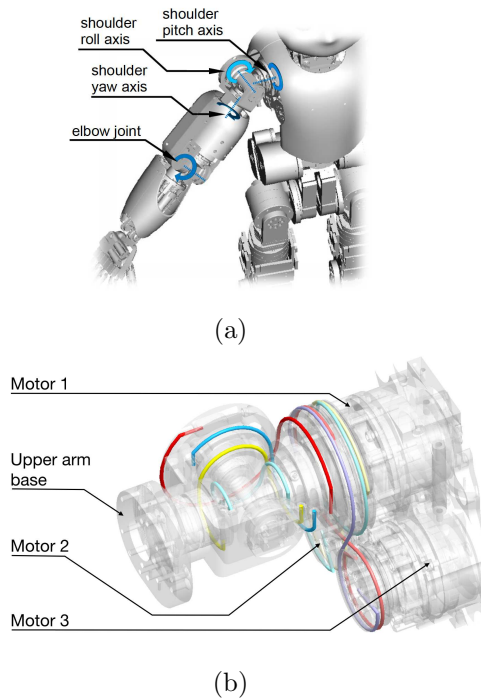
CAD view of the iCub right arm with the three coupled shoulder joints (a) and CAD view of the shoudler joints actuated by the differential drive and three motors. Source: [Parmiggiani et al., 2012, Fig.4 & 5]
